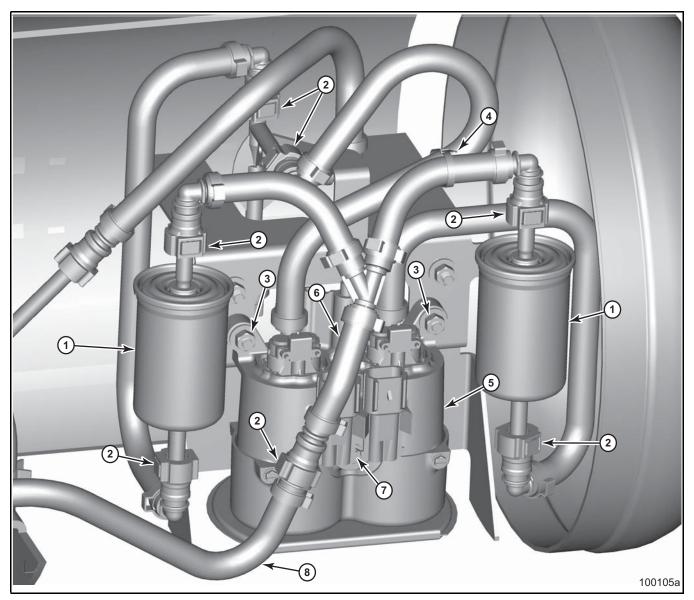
Fuel Pump Assembly, Hoses and Filters
